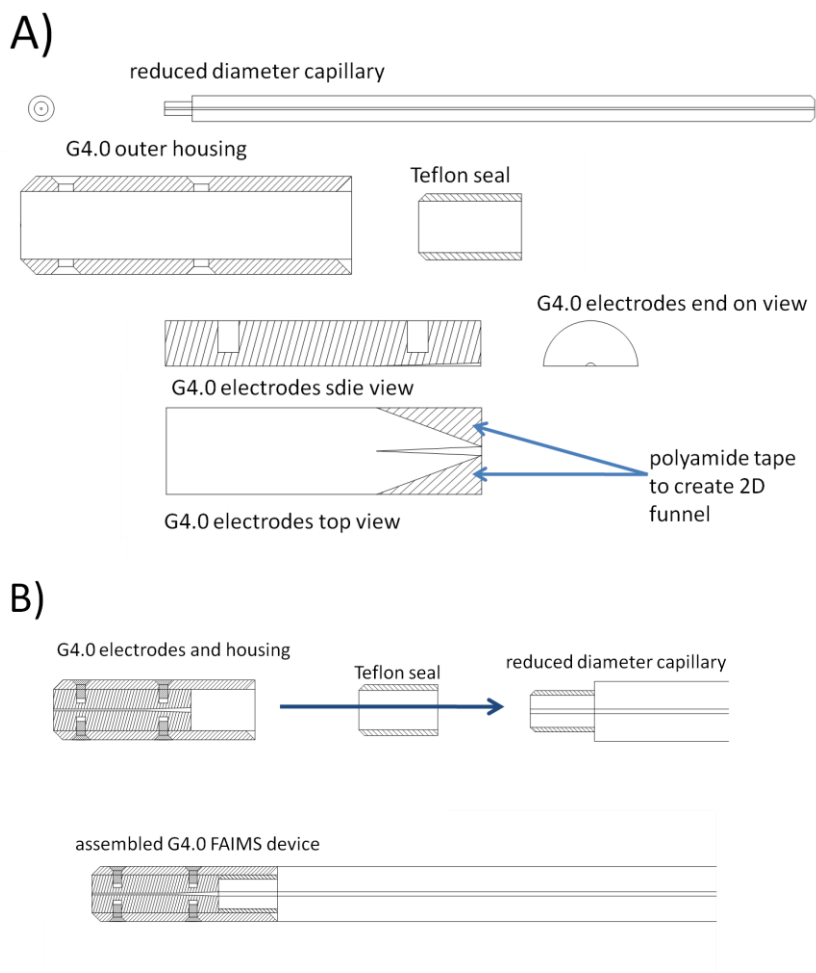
Mechanical drawings of the G4.0 with labeled components A) and the completed assemble B).
